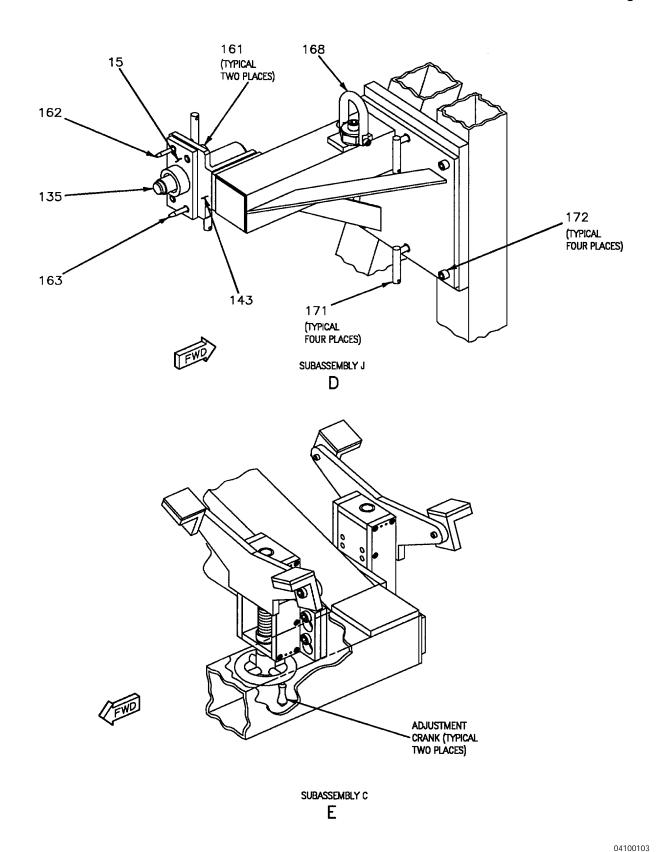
Engine Air Inlet Installation Alignment Fixture; RE474322020-1/-2 (Sheet 3)
